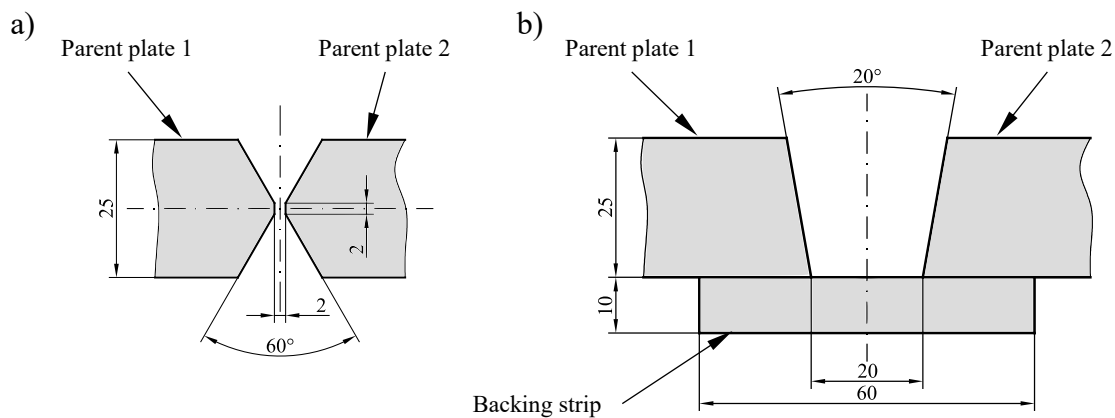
Utilized weld grooves in a) double V configuration and b) wide V configuration.
